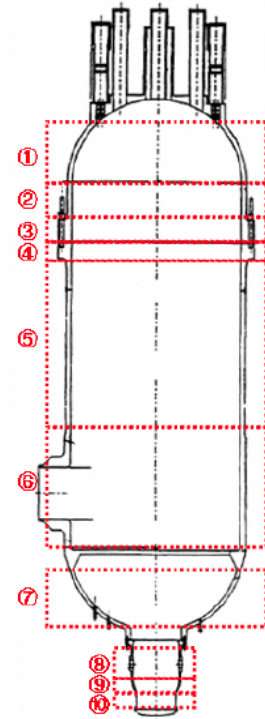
Shell/head fabrication by plate bending with bill of material.
